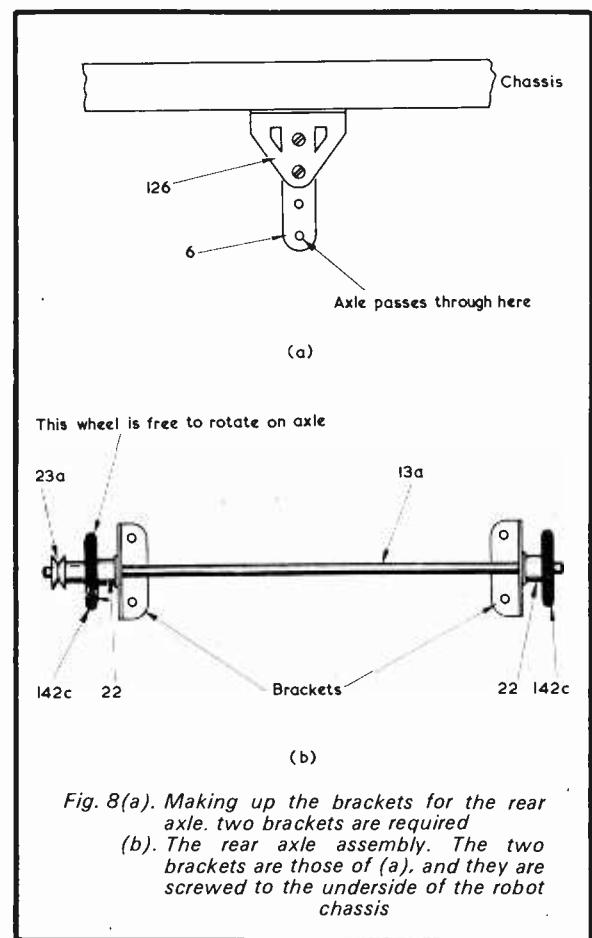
(a). Making up the brackets for the rear axle, two brackets are required
